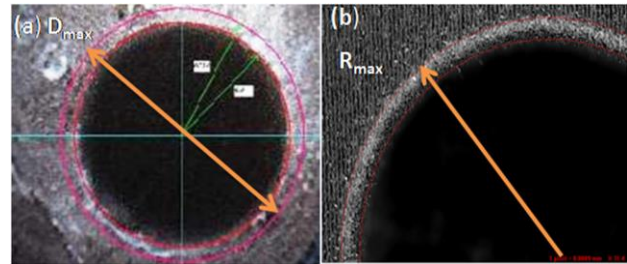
Measurement of maximum damage drilled hole diameter ( $D_{max}$ ): (a) Peel up at the entry hole and (b) Push out at the exit hole [8].
